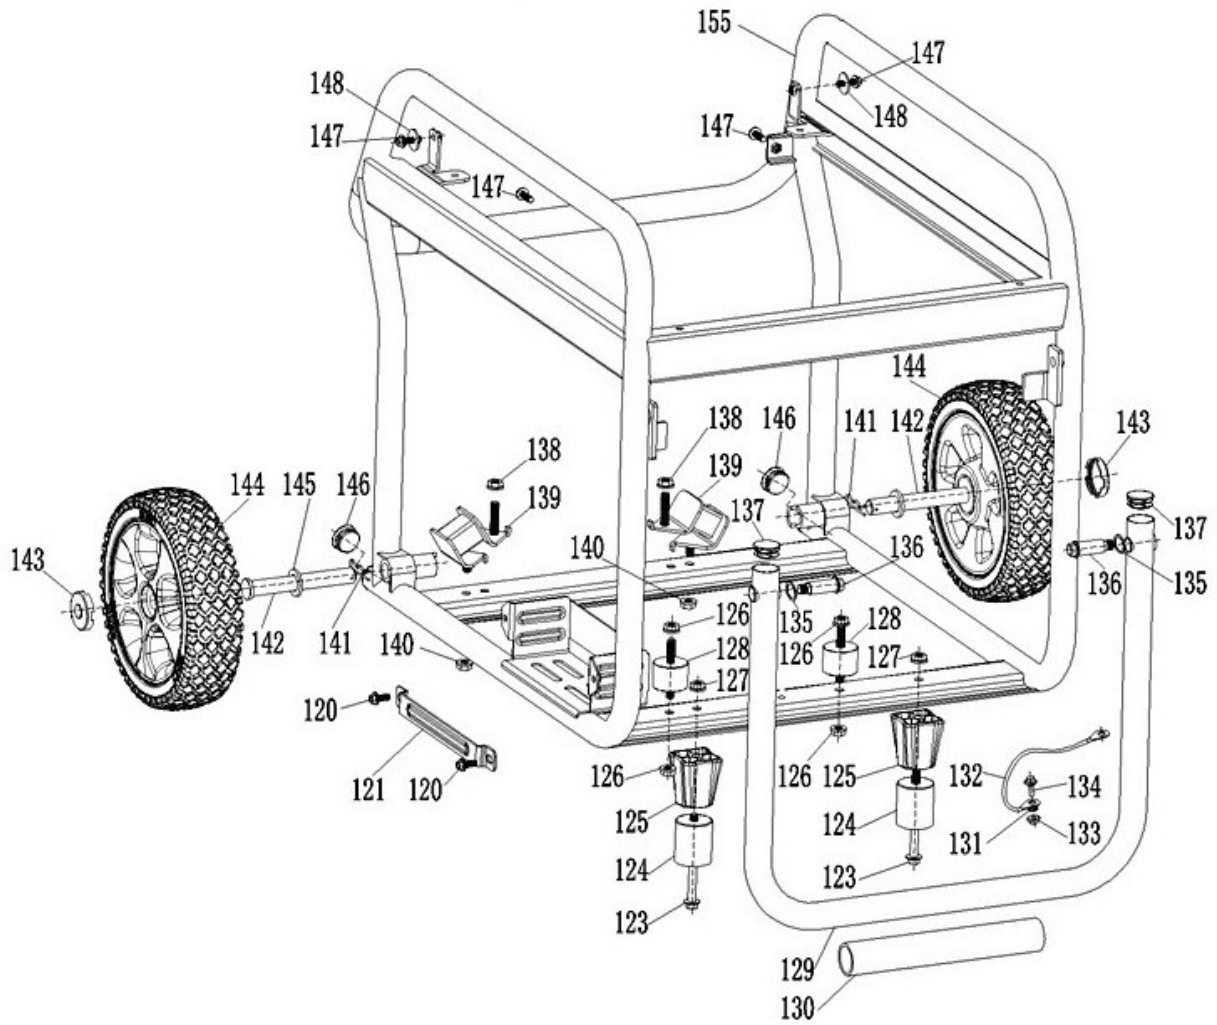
Spare parts drawing PG-E 60 SEA, PG-E 80 TEA and PG-E 90 SEA - complete assembly
